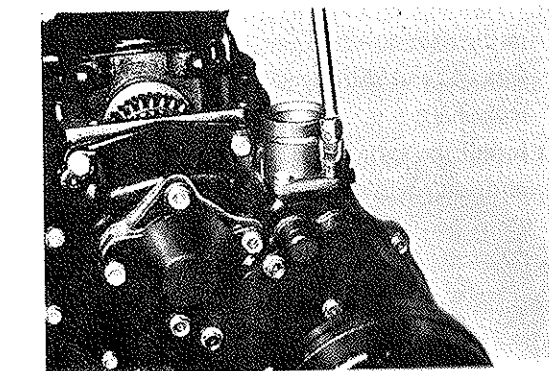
Attaching Transfer Shift Lever Retainer
